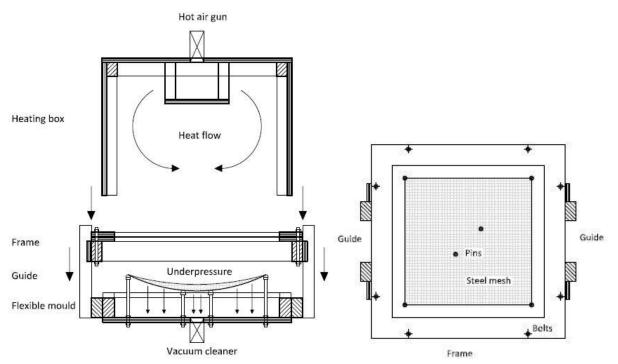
Section of the vacuum forming machine & Figure 56b: Top view of the vacuum forming machine
